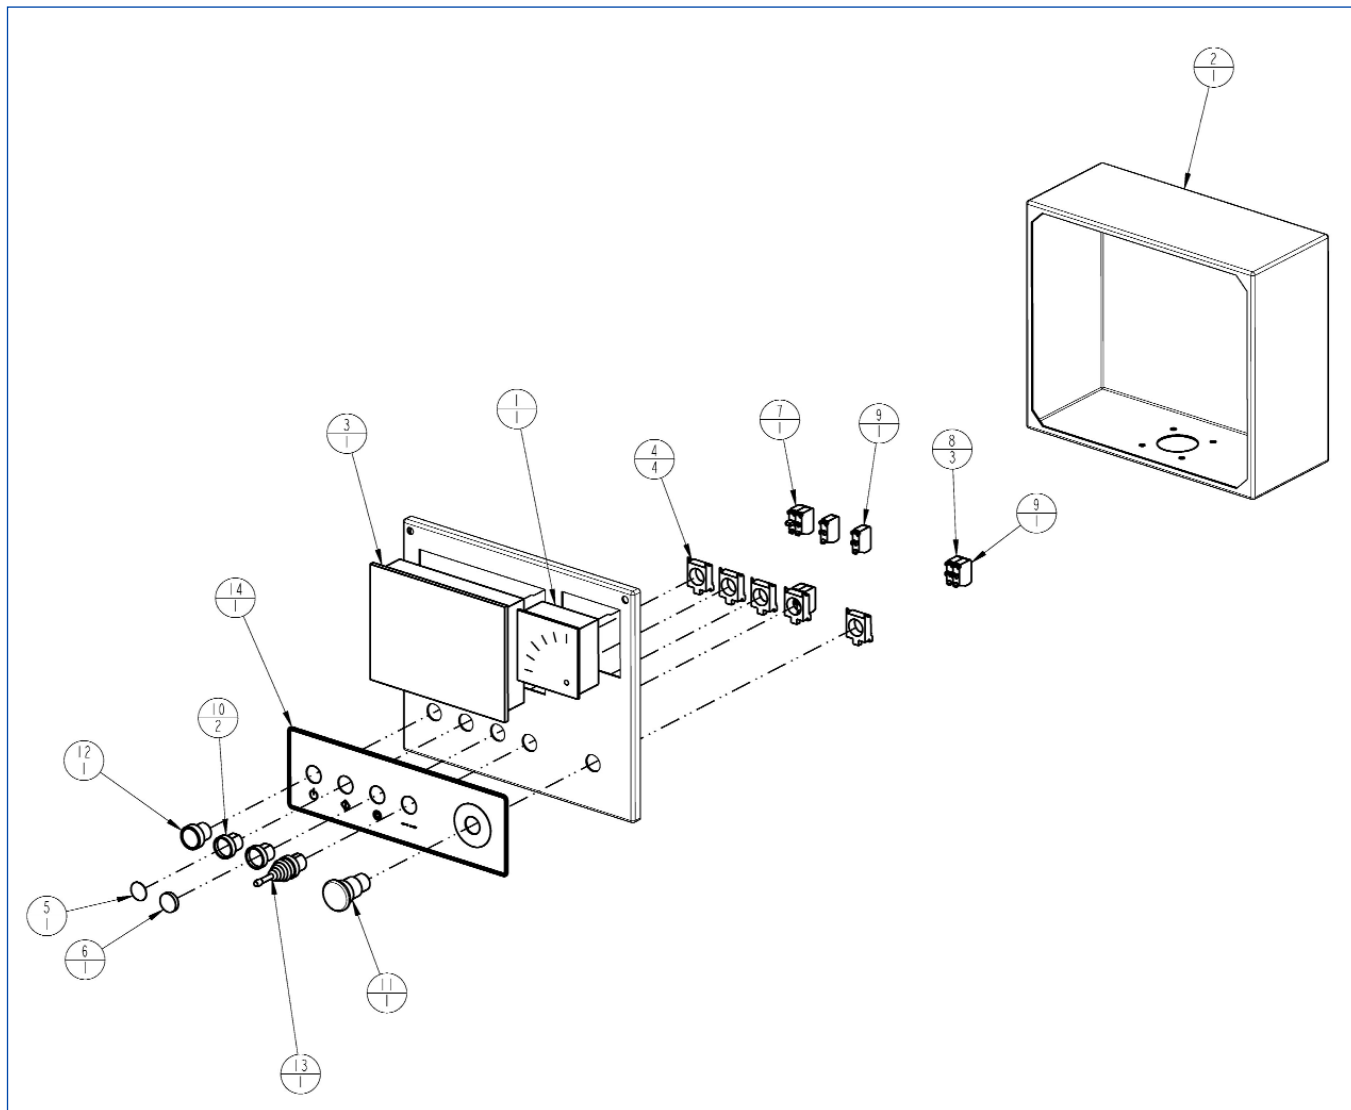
A – OPERATOR BOX ASSEMBLY
